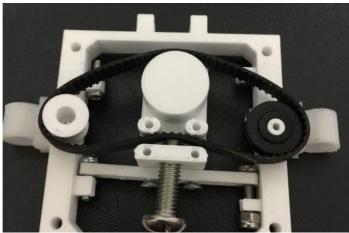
AUTOMATIC PLACEMENT OF TRANSDUCER
